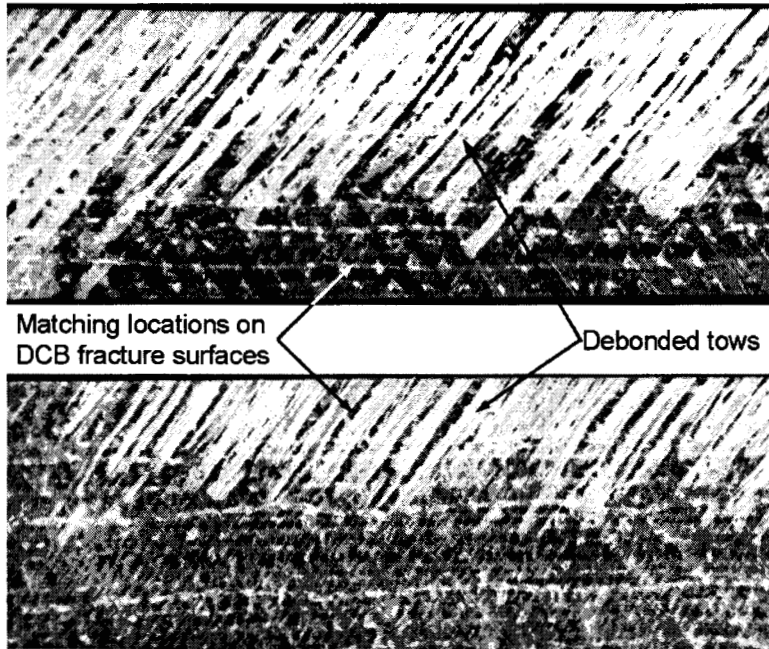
Fracture Surface for a $(\pm 45)_{10}$ DCB specimen.
